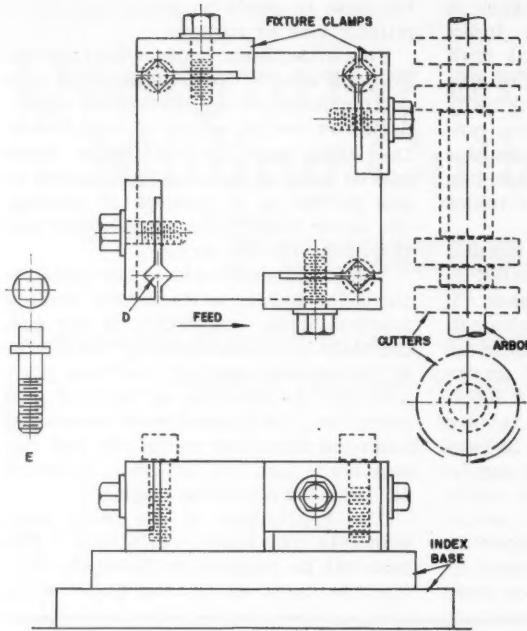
Fixture mounted on an Index Base for Straddle-Milling, in one operation, the four sides of the collar-screw-head shown at E
